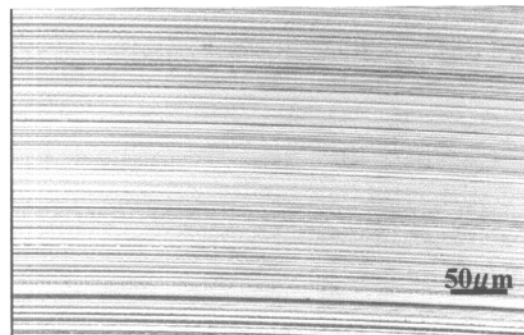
Shear (or ductile) mode surface of the single-crystal Si using the new Engineered Tool
